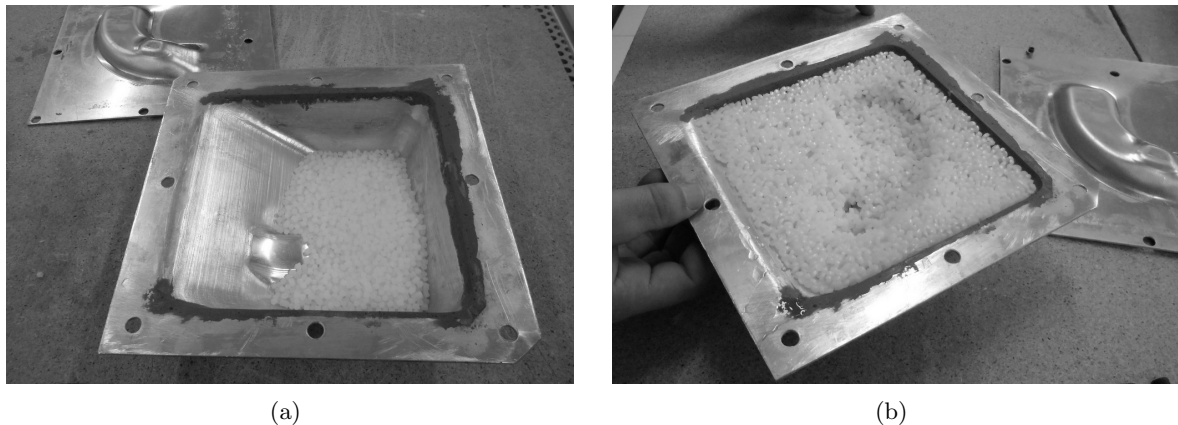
Rotomoulding operation with the unfinished SPIF mould: (a) LDPE pellets fill up (b) open mould after moulding operation
